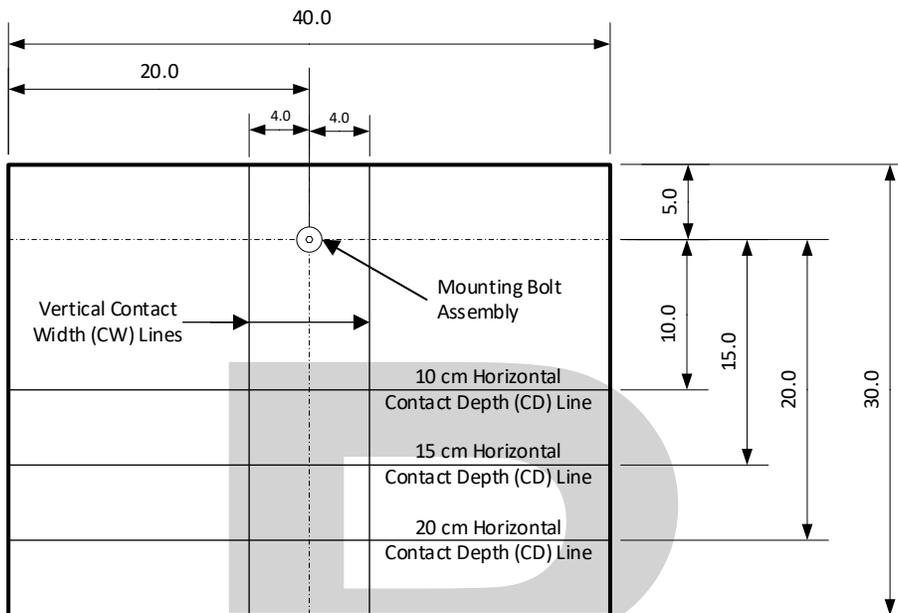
Testing Wall (not to scale, dimensions in cm)
